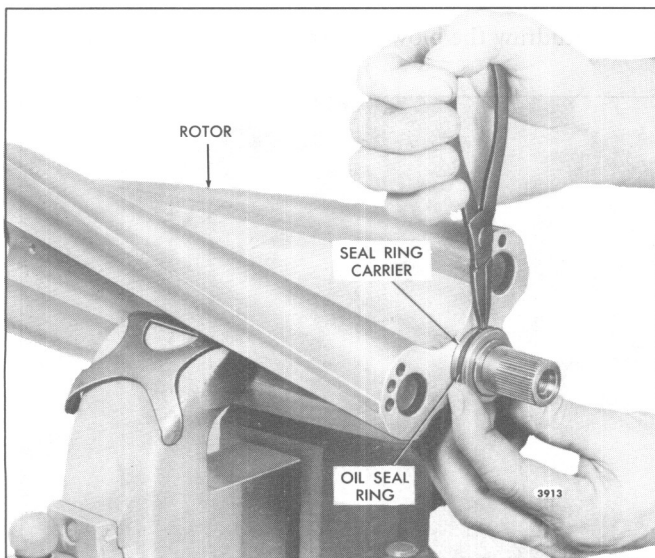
Removing Oil Seal Ring from Carrier (Turbocharged Engine Blowers)
